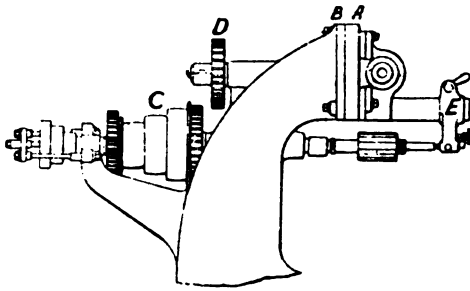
Head of Dubosc Machine swivelled for Horizontal Work.
